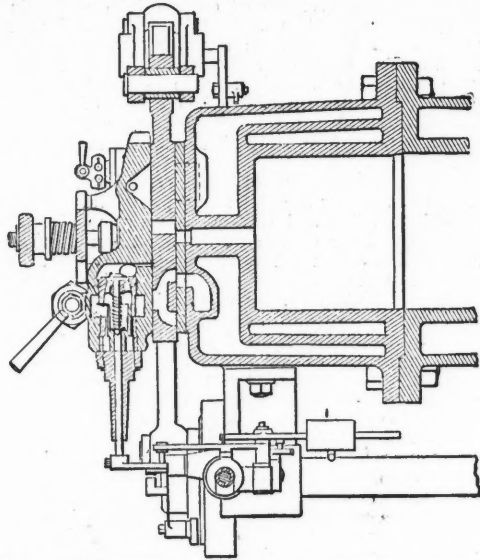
ROLLASON GAS ENGINE—SECTION OF CYLINDER.
